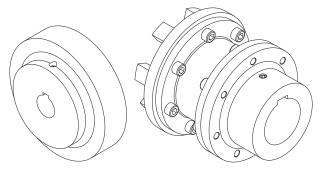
Pump-side and motor-side halves of the coupling with spacer and cam ring
